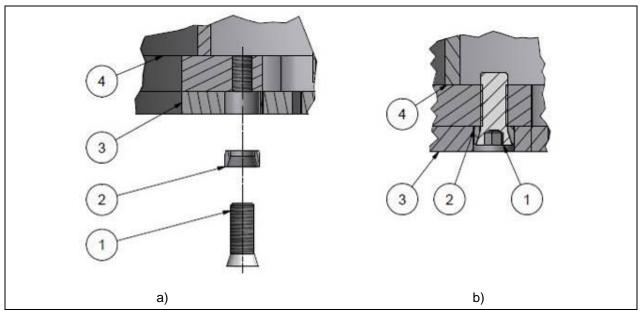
Installation: tensioning screw, clamping sleeve, cutting screen on the cutter head
